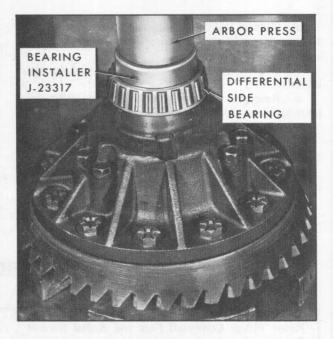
Installing Differential Side Bearings (Controlled)
